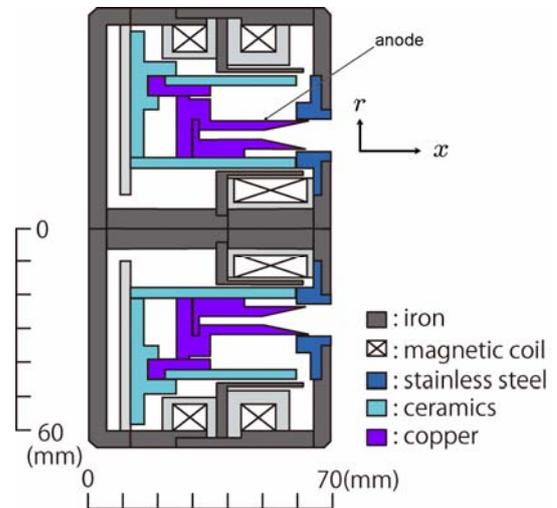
Cross-sectional view of TALT-2a Hall thruster.
